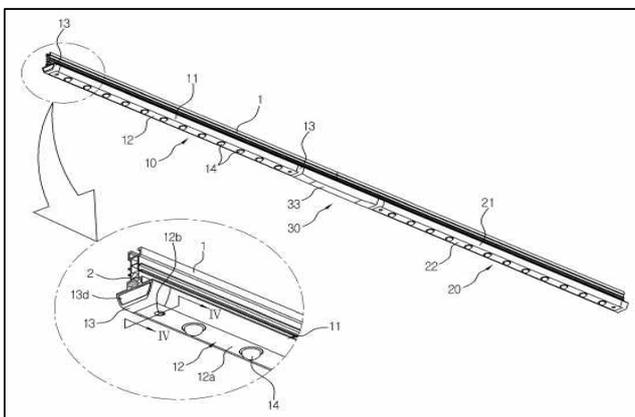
Perspective on Patented TD LED Lighting Fixture
